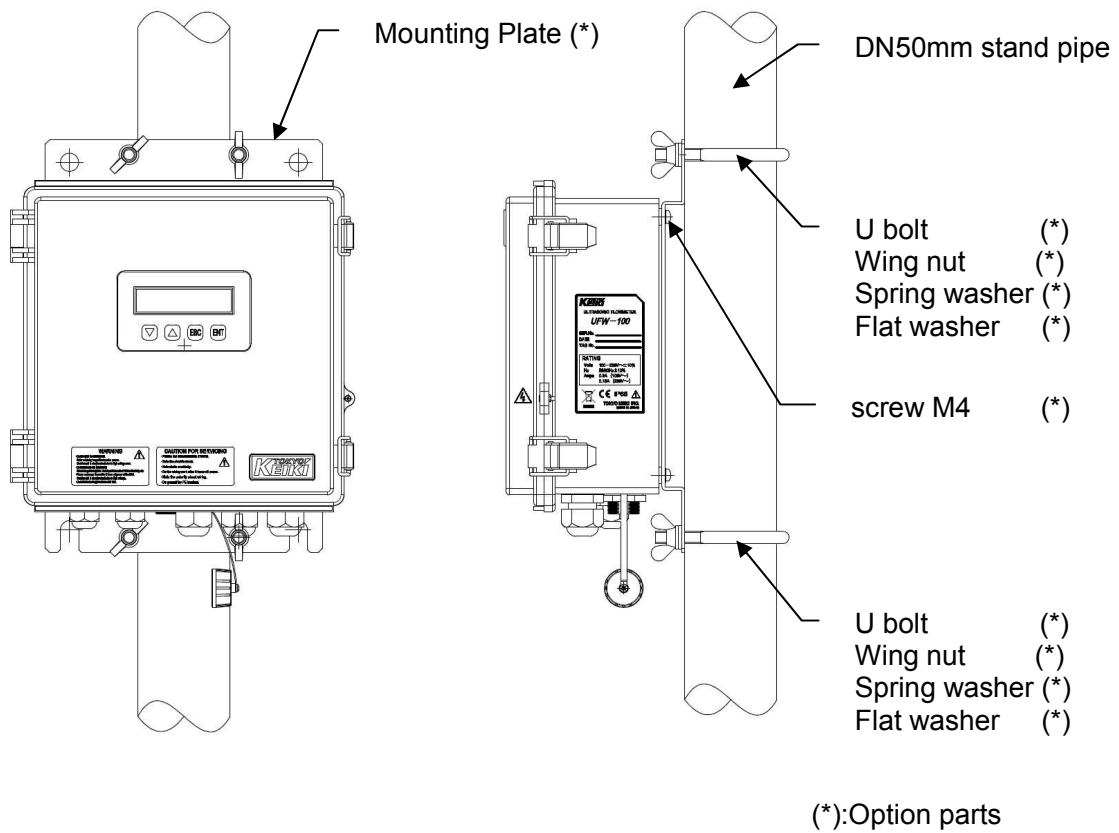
DN50mm stand pipe mounting (by mounting plate, Option parts)
